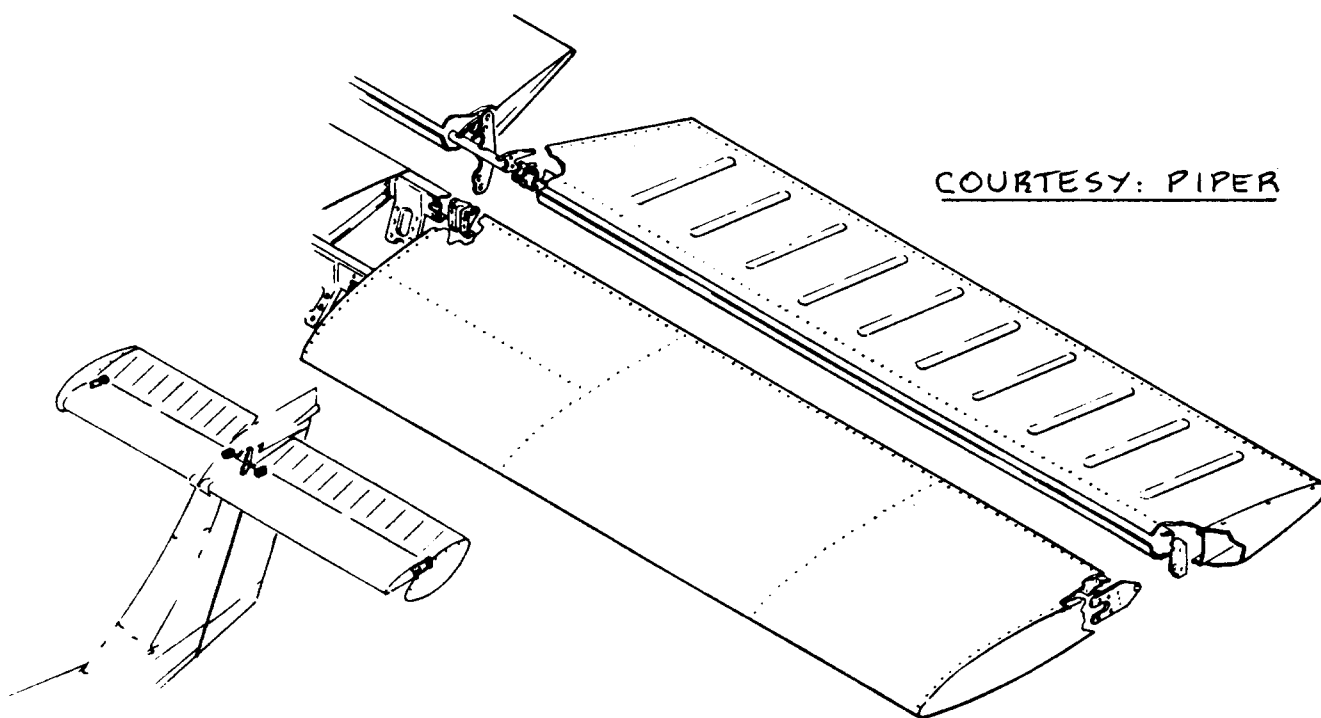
Elevator Arrangement Piper PA-38 112 Tomahawk
